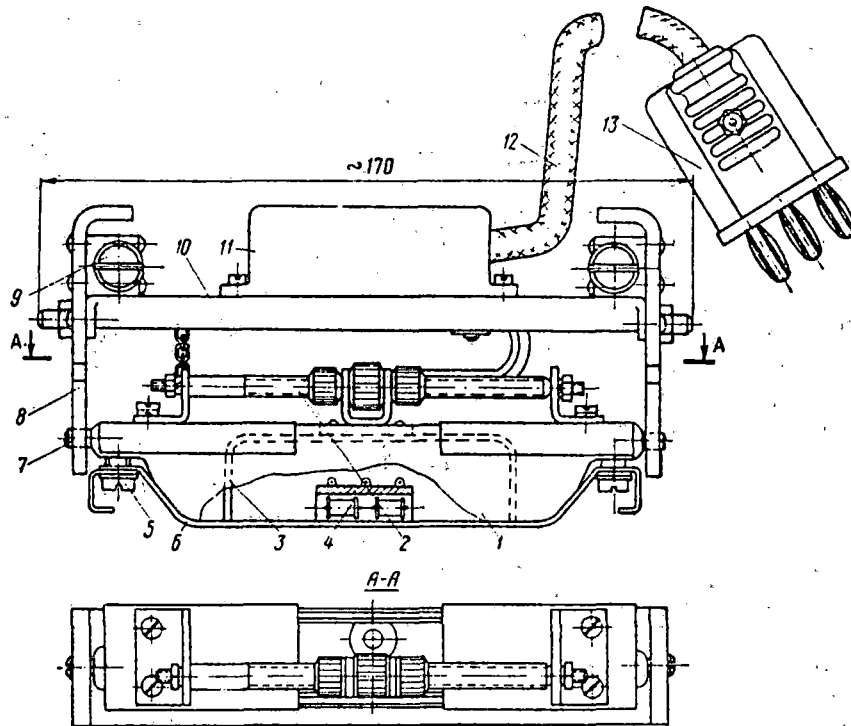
Sensor assembly for the MRD-52 flaw detector.
